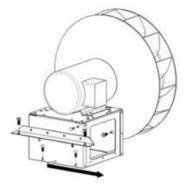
Bolts with Connect Motor Mount to Blower Fan
